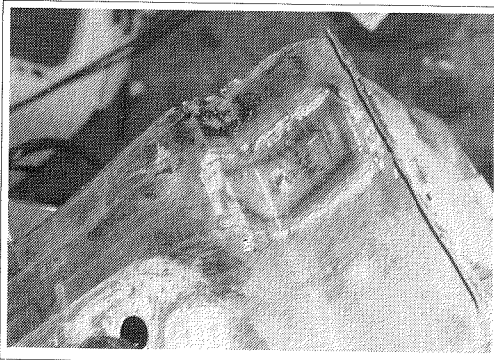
and finish off with a seam weld. Grind off the metal strip and dress back the weld. The repair should be sealed from the inside with a flexible sealer when all welding is complete.
